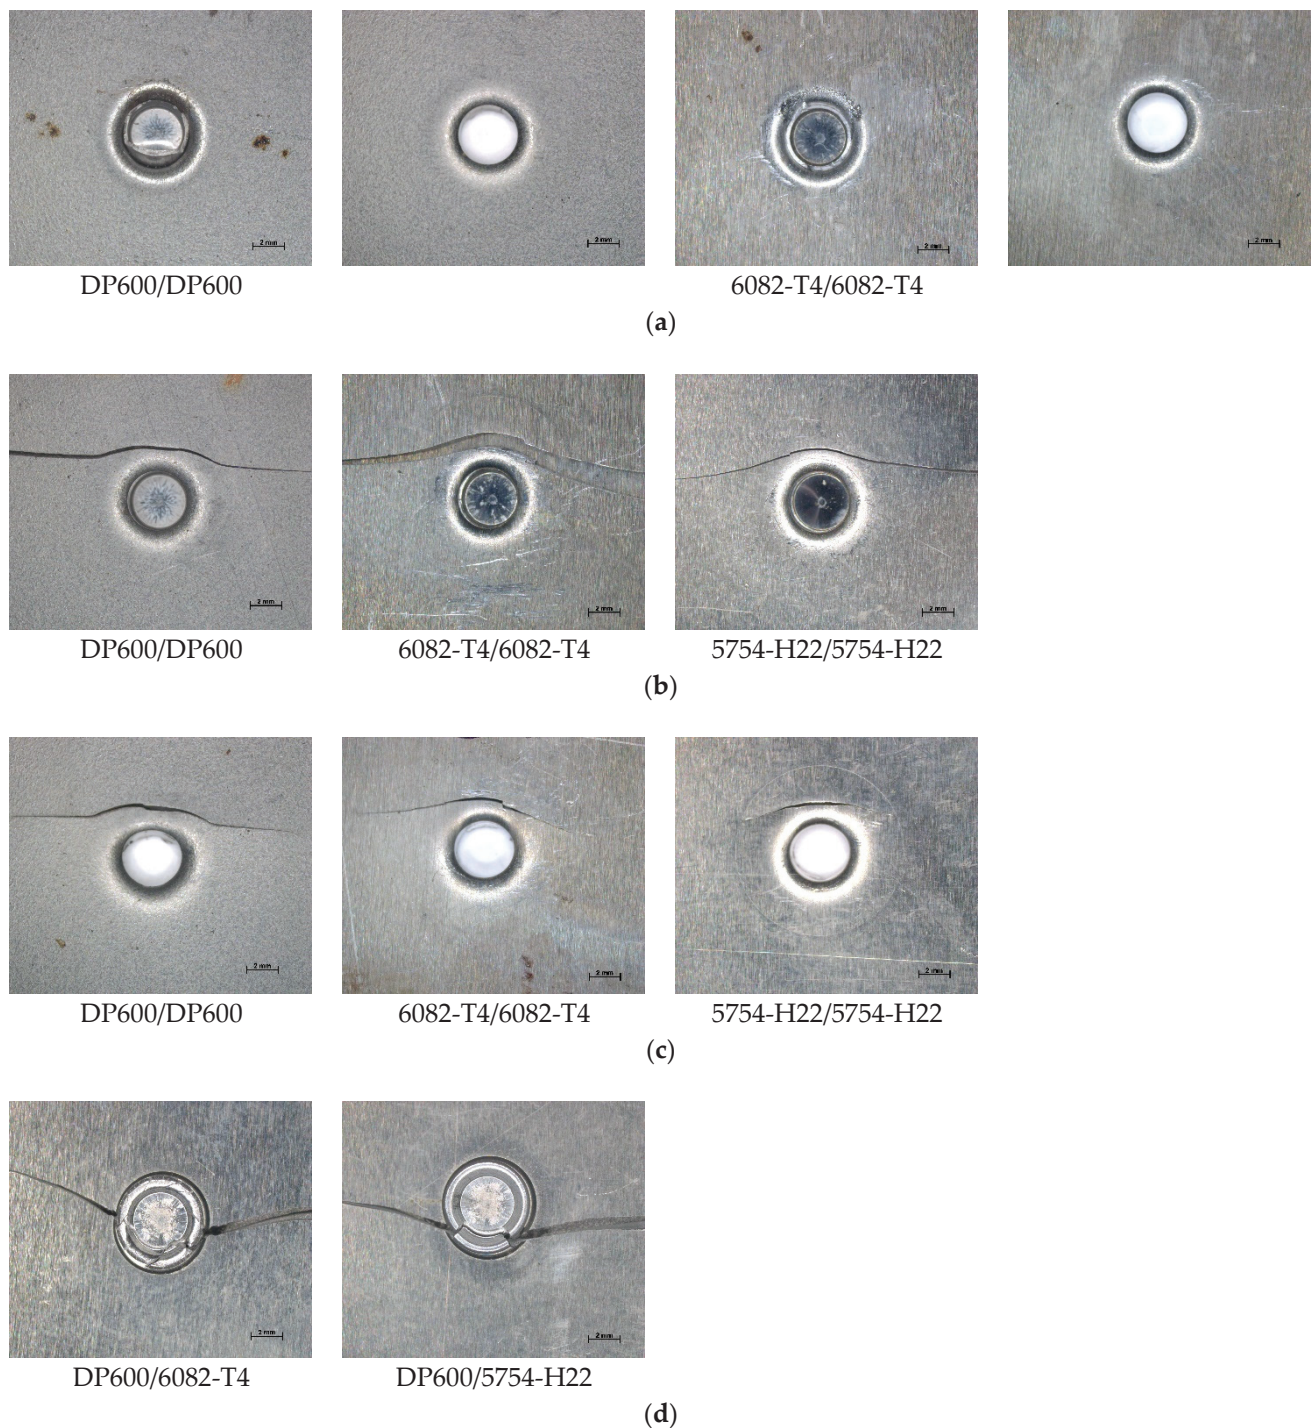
Failure modes during high-cycle fatigue testing of the CCL specimens: (a) button neck fracture, (b) button neck fracture, (c) base material fracture and button neck fracture, (d) crack initiation in the joint and crack growth in the aluminum alloy.
